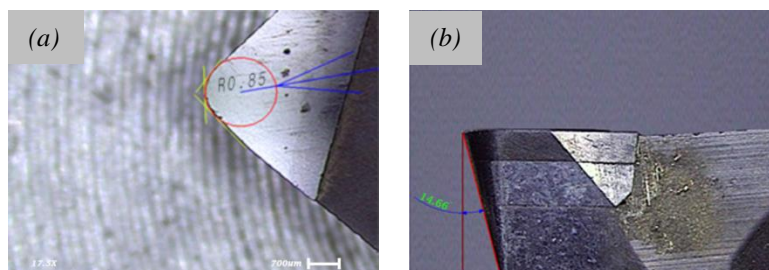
Image of the tool used in the experimental experiment by the VMS machine. a) Tool nose radius. b) Clearance angle of the tool
